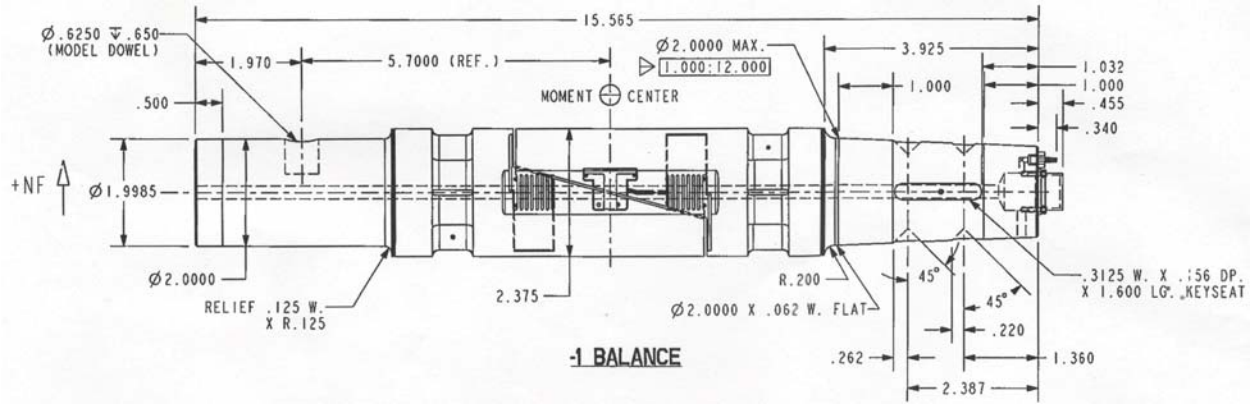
Outline drawing of NTF-118A strain gauge balance.
